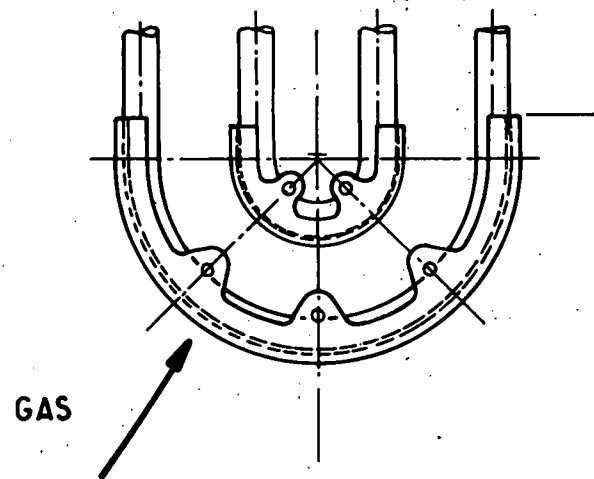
Lower Superheater Tube Bends Protected by Shields.
